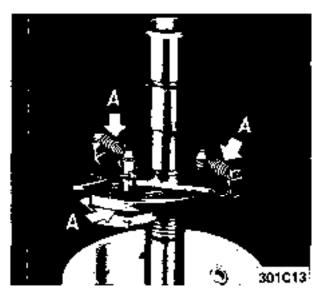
C-13 Lubricating Centrifugal Mechanism Reassembly
